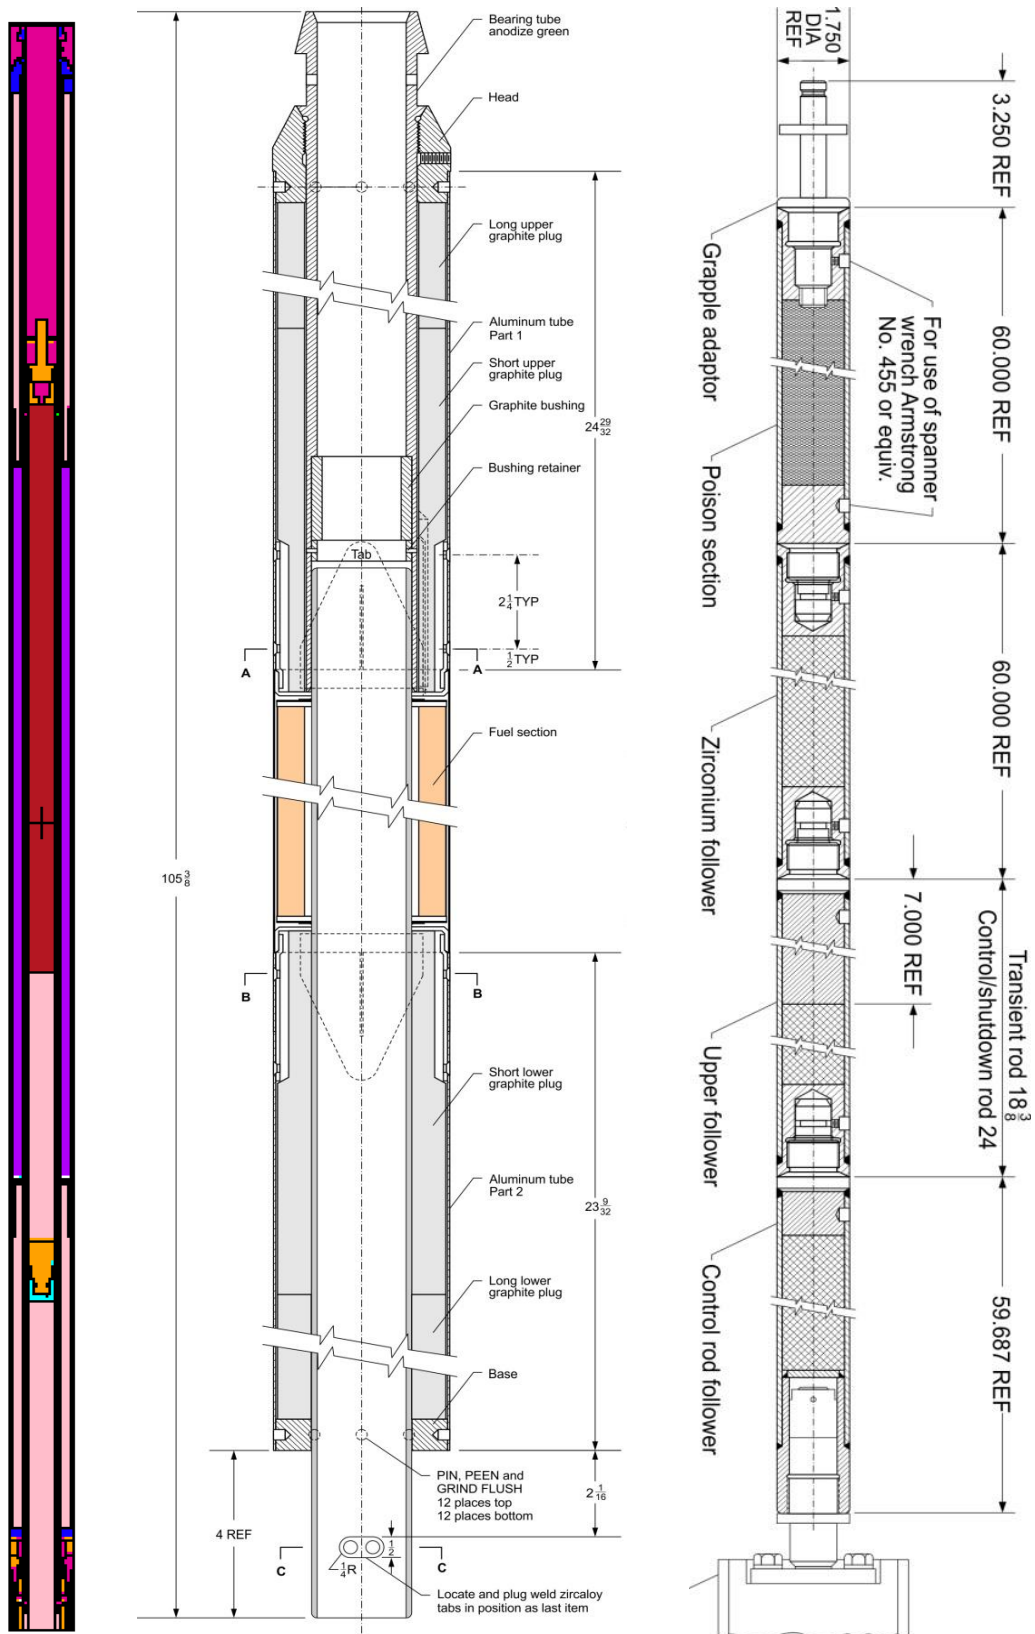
Control Rod Fuel Assembly with Control Rod: Model (Left) and Drawings (Right).
